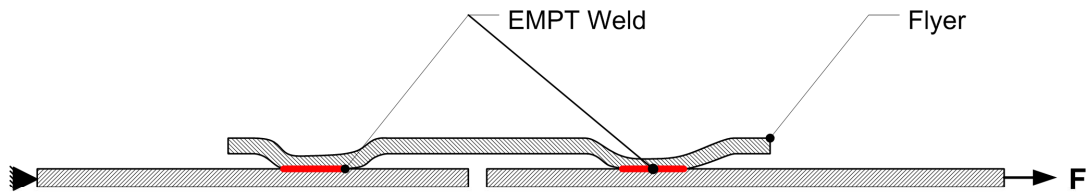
EMPT welded tensile test specimen (25.11.2010)
